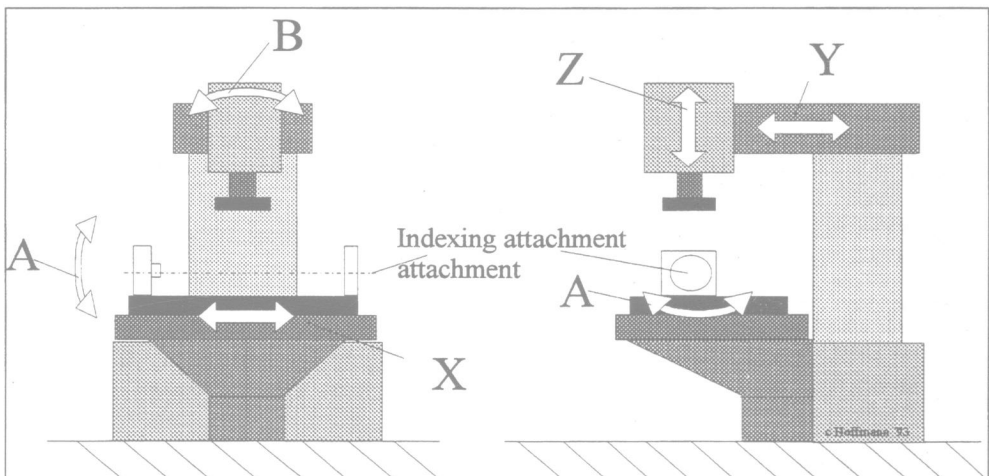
HURON type milling machine fitted with a Heidenhain digitizing system;
